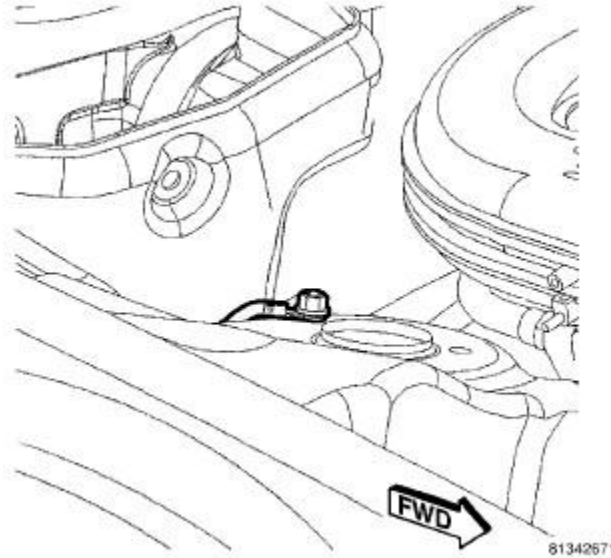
Fastener Securing Negative Battery Cable To Right Front Strut Tower
